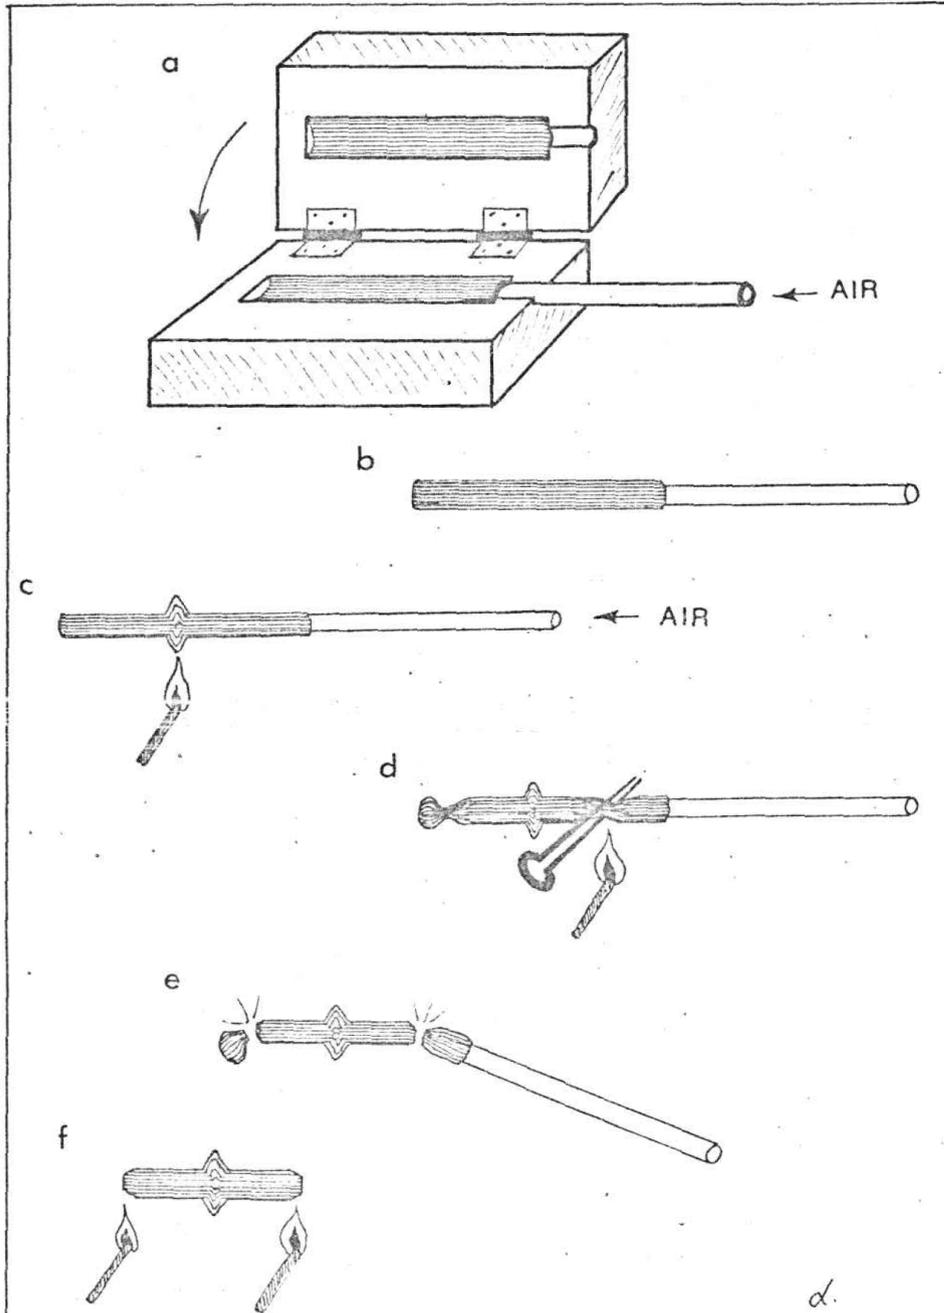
Manufacturing sequence for blown beads: a. Glass tube blown in mold, b. Grooved tube removed and cooled, c. Upset decoration formed, d. Tube crimped, e. Ends snapped, f. Ends fire polished.
